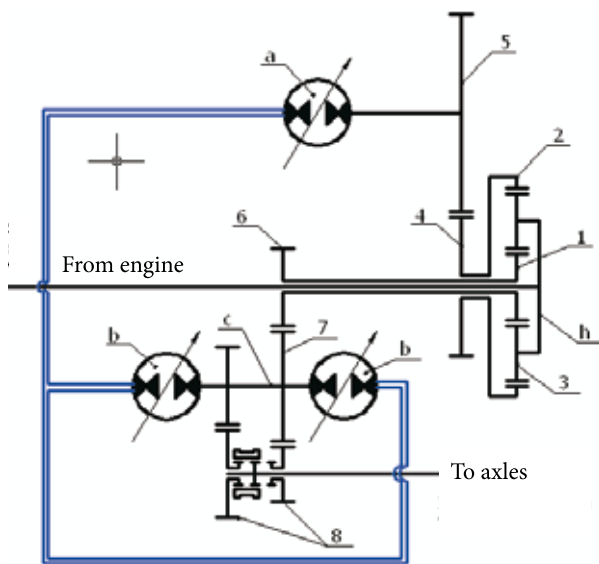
Kinematic scheme of split power transmission (Fendt Vario): a and b – adjustable hydraulic pump and motors; c – sum. shaft; h – carrier; 1 and 2 – sun and coronary gears; 3 – satellite; 4, 5, 6 and 7 – gears; 8 – two-step reducer
